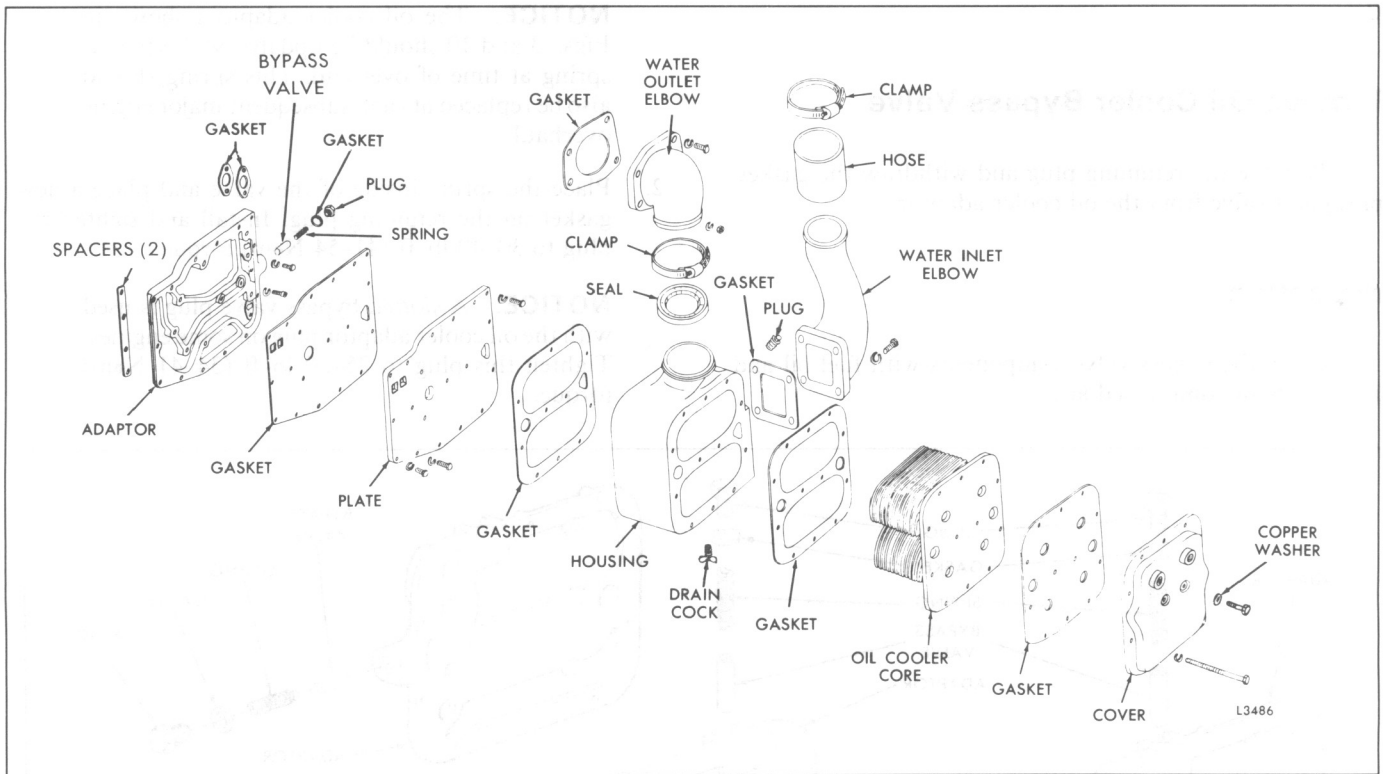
Twin Plate Oil Cooler Details and Relative Location of Parts
